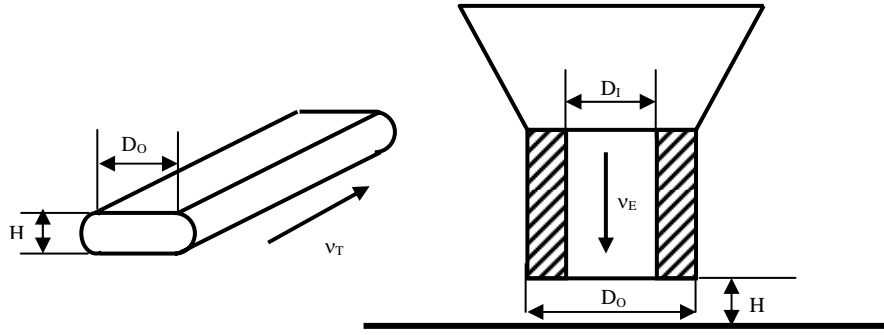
Schematic drawings showing the dimensions of the nozzle and slab shape depositions
